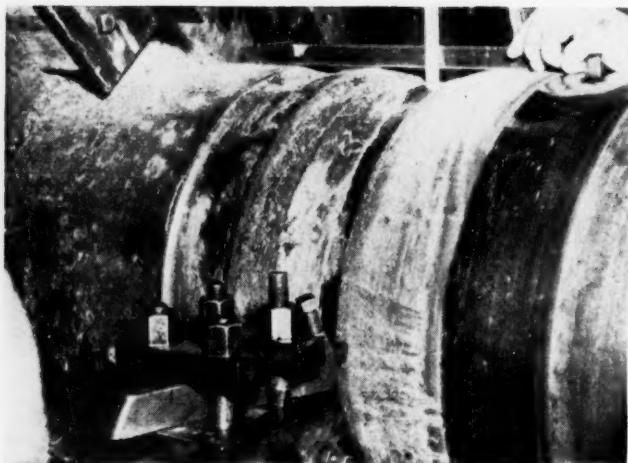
A 20-inch grooved shaft at gland location on a 20,000 h.p. turbine.
